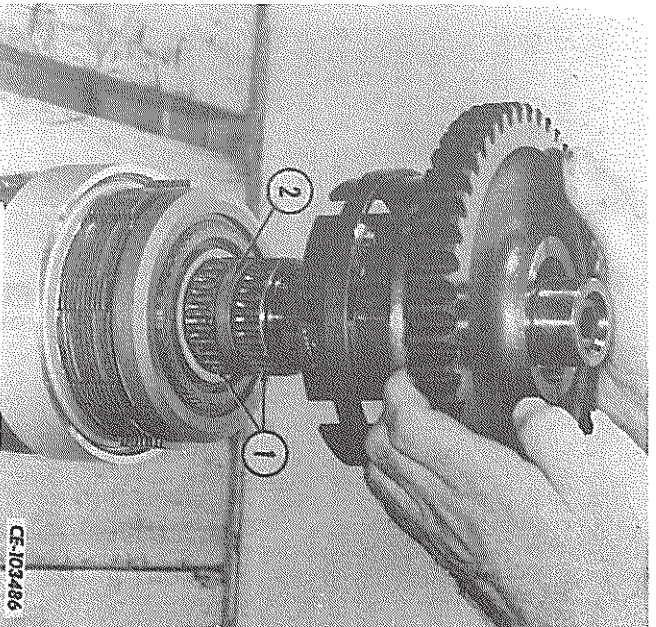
Removing the Clutch Gear and Drum Assembly
